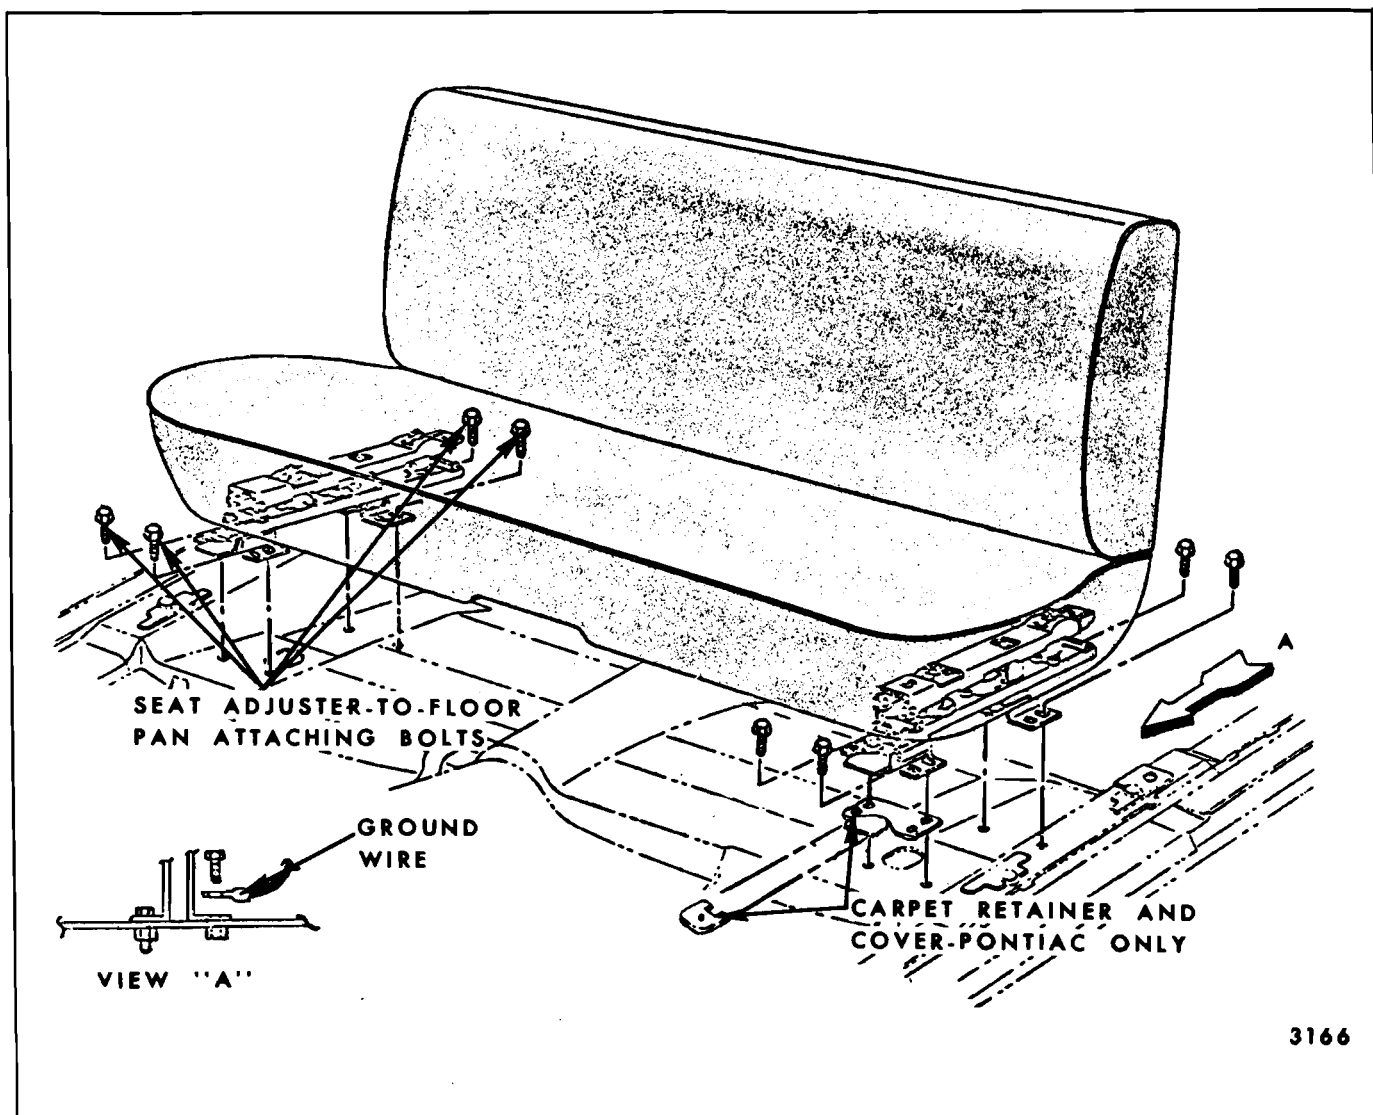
Seat Adjuster Floor Pan Attachment - Full Width Standard Seats (Power Six-Way Shown - Two-Way and Four-Way Typical)
